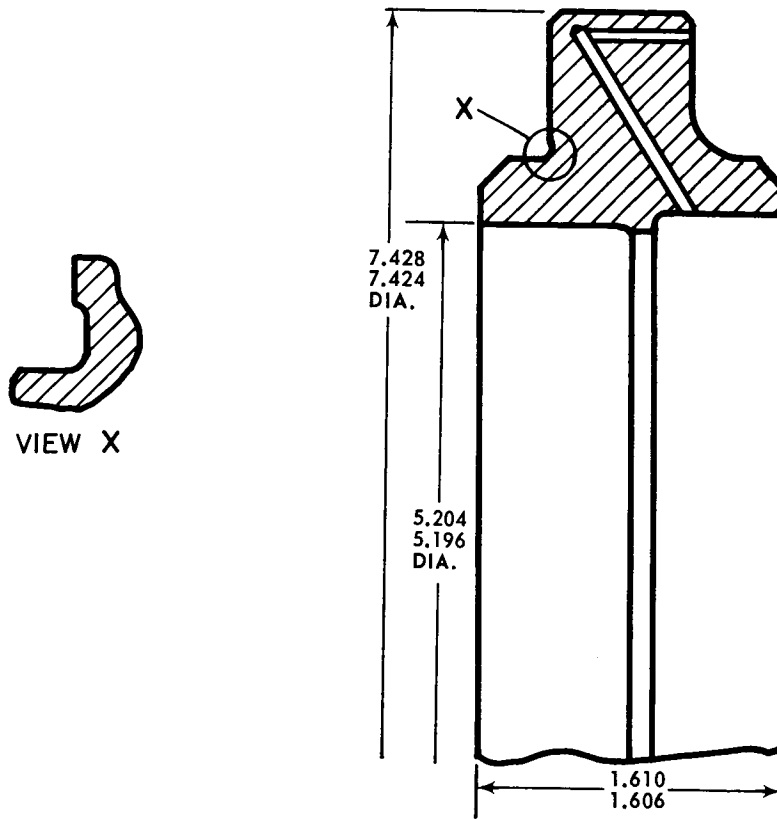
Seal Plate For Face Contact Bellows Secondary Seal
